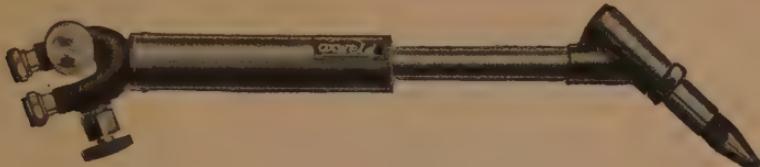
Oxy-Acetylene Welding Blowpipe
